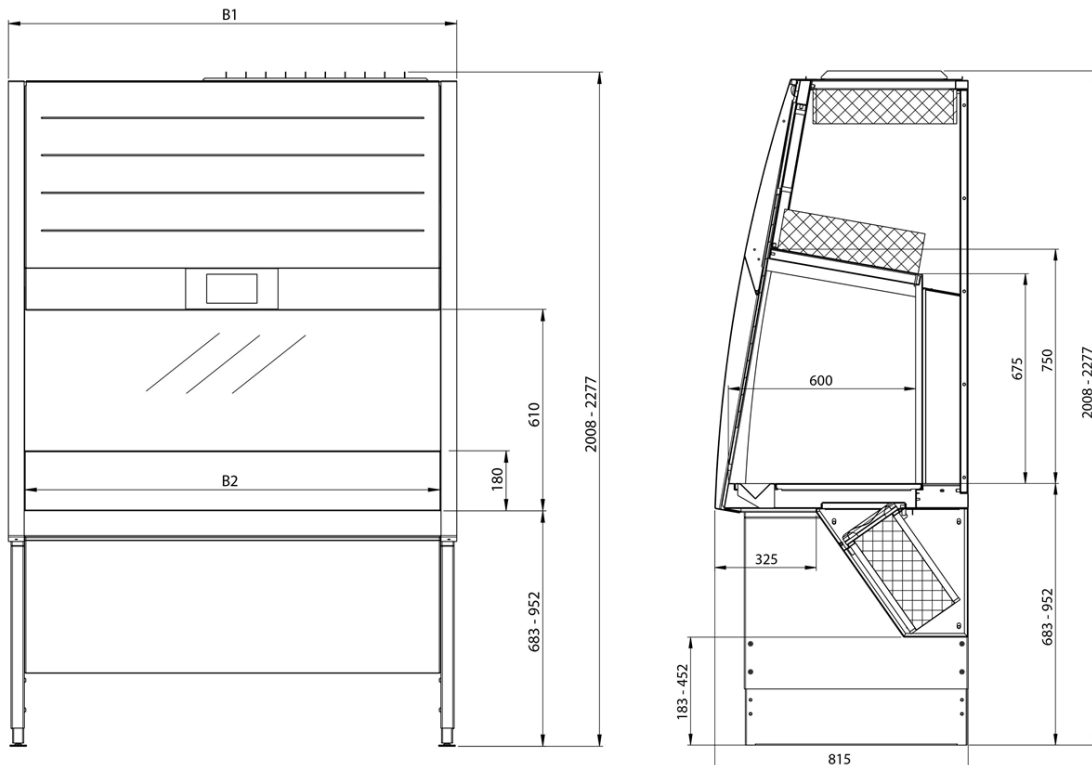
Design and dimensions of the safety cabinet in front and side view; example: claire® pure B/C-3-130 (B1 = width, outer dimensions; B2 = width of the working access opening, depending on the model size, see table of technical data)
